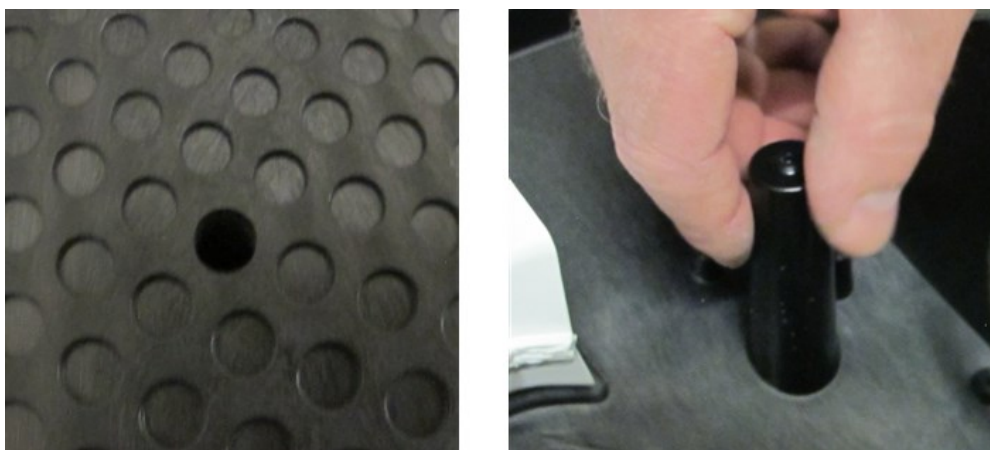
Disassembly of the loudspeaker's front cover.
